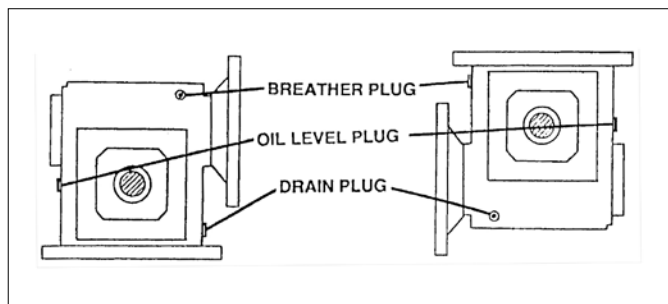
GEARBOX SCHEMATIC (TYPICAL)
